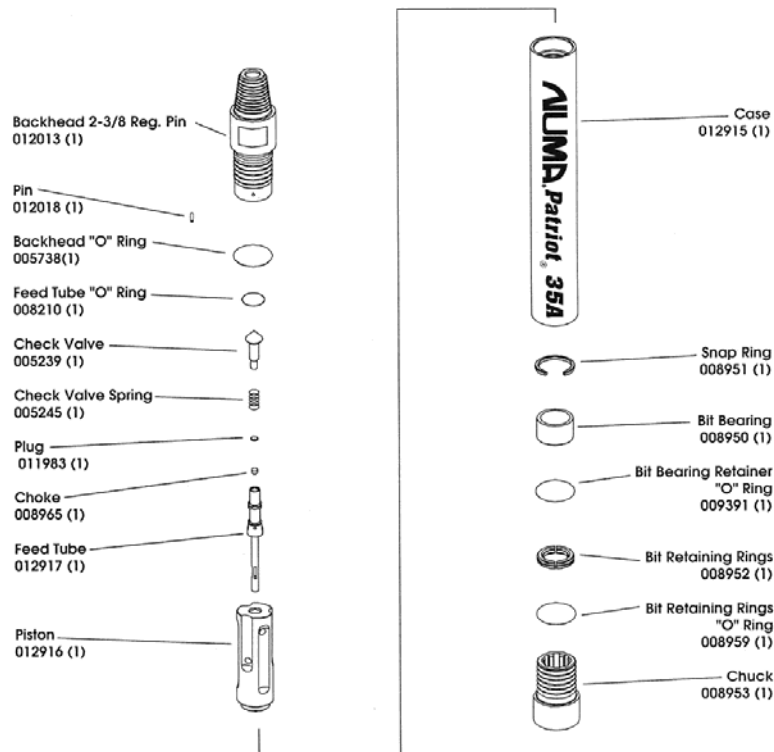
Exploded view of typical commercial DTH hammer (Courtesy of Numa).
